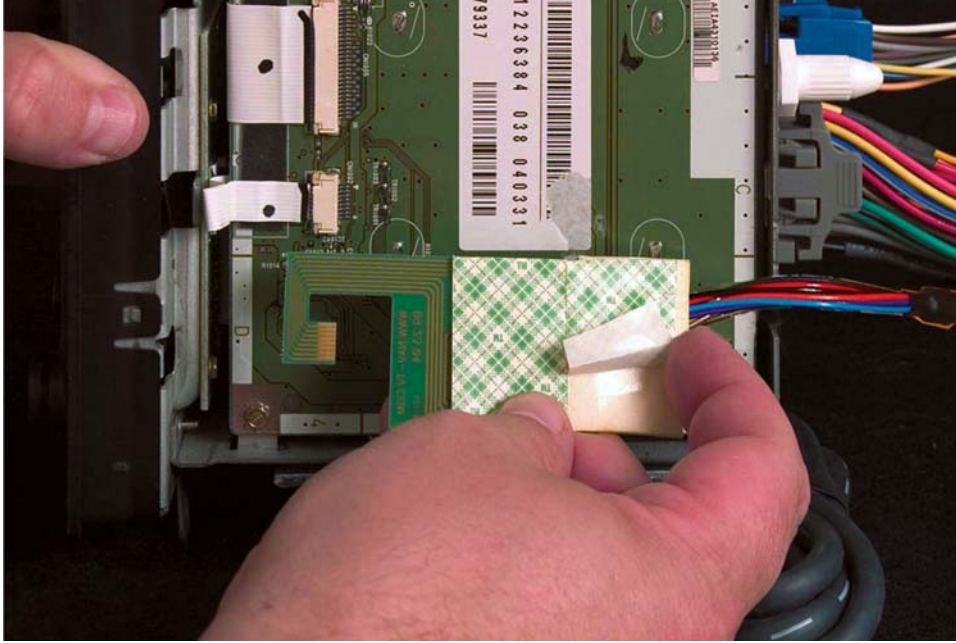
Just to familiarize yourself with the layout – the RGB circuit board or PCB will be positioned roughly in this way with the leads running out of the back of the radio through a small slot. The picture above has the PCB flipped – eventually it will be aligned the same way only upside down. First though peel about half of the tape adhesive back – this will aid later when the PCB is in place to remove the tape and affix the PCB to the radio. Once this is complete set the PCB aside so that we may continue with the steps to replace the ribbon connector.
